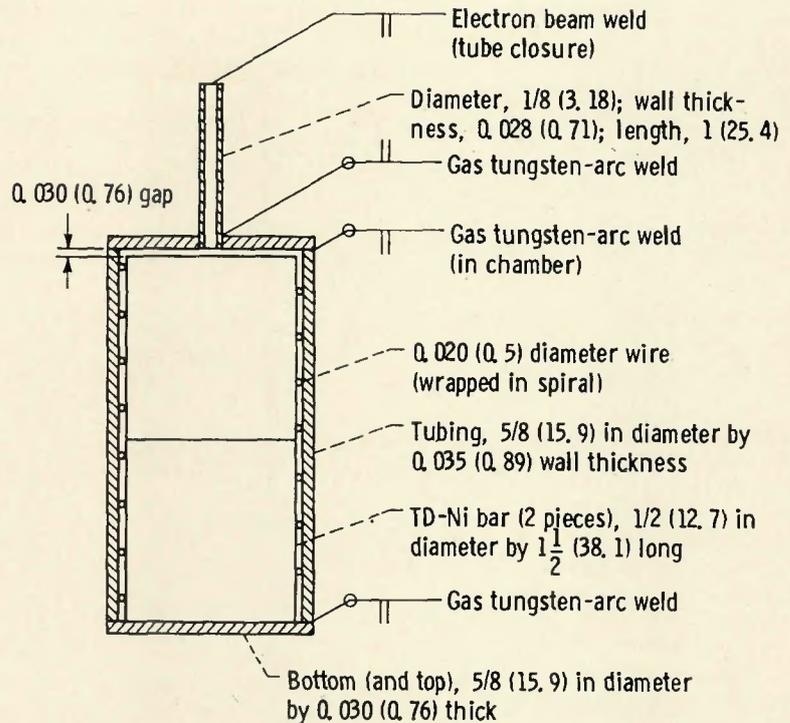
Schematic of $\frac{1}{2}$ in. (12.7 mm) diameter TD-nickel bar specimens in AISI Type 304 stainless-steel cans. Specimens are wrapped with Type 304 stainless-steel wire to minimize misalignment of the specimens at the butt joint. (Dimensions are in inches (mm))
